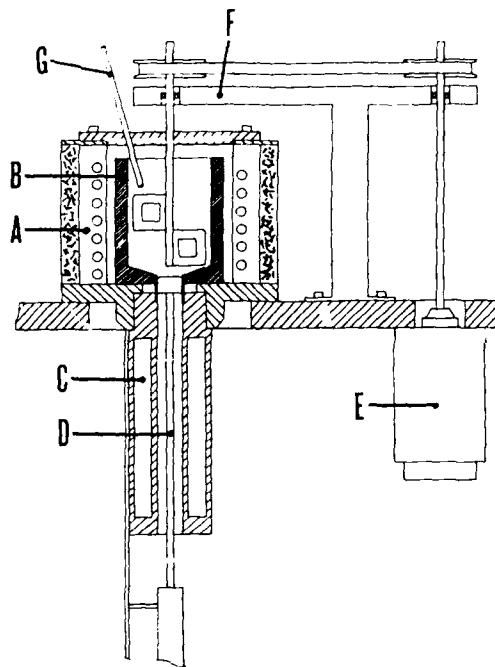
Compocasting apparatus used for the production of the SiC/AlMg1Si1 composites. A: electrical resistance furnace; B: graphite crucible; C: water cooled steel mould; D: stopper assembly; E: motor; F: stirrer assembly; G: particle injection.
